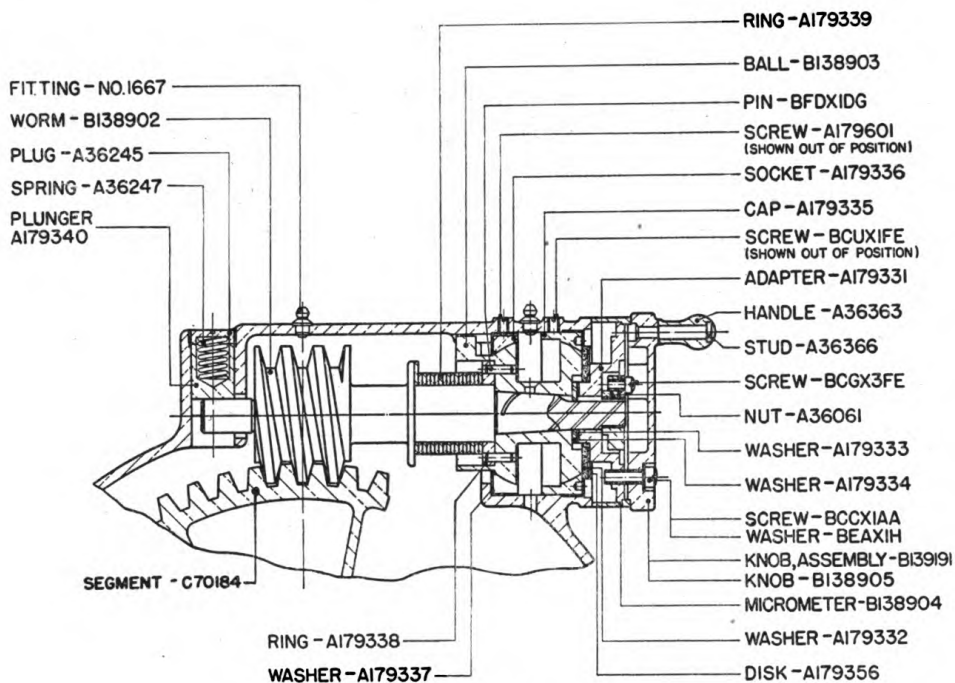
Elevation quadrant M1—assembled views, covers removed.
